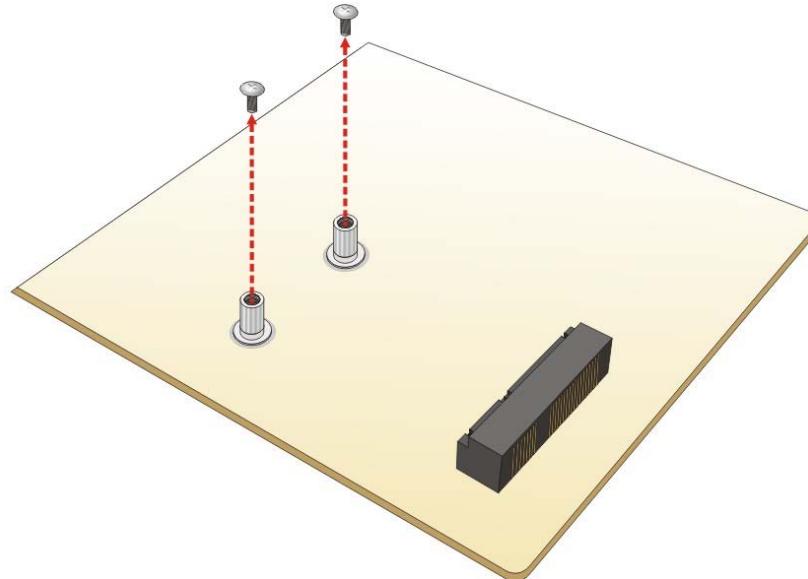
Remove the Retention Screws for the PCIe Mini Card
